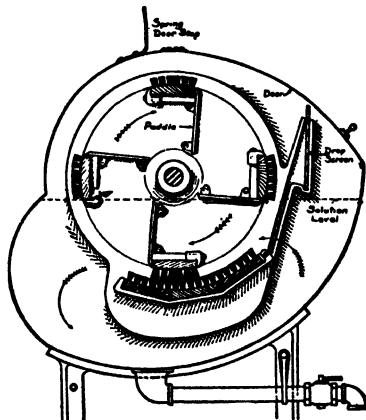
Sectional View of Interior of Glove-cleaning Machine.
